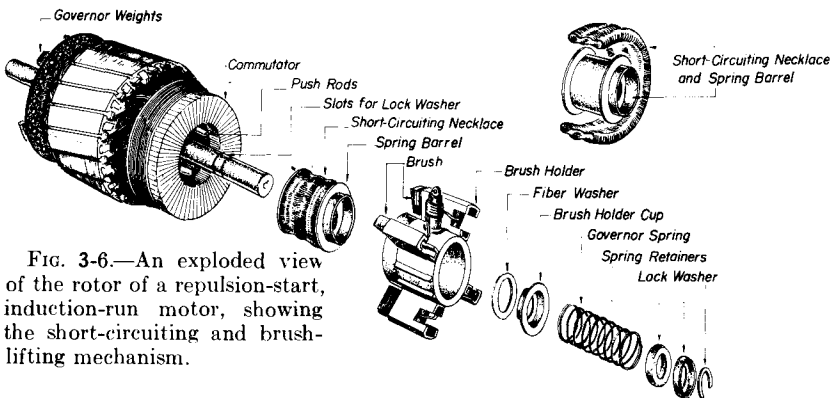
An exploded view of the rotor of a repulsion-start, induction-run motor, showing the short-circuiting and brush-lifting mechanism.
